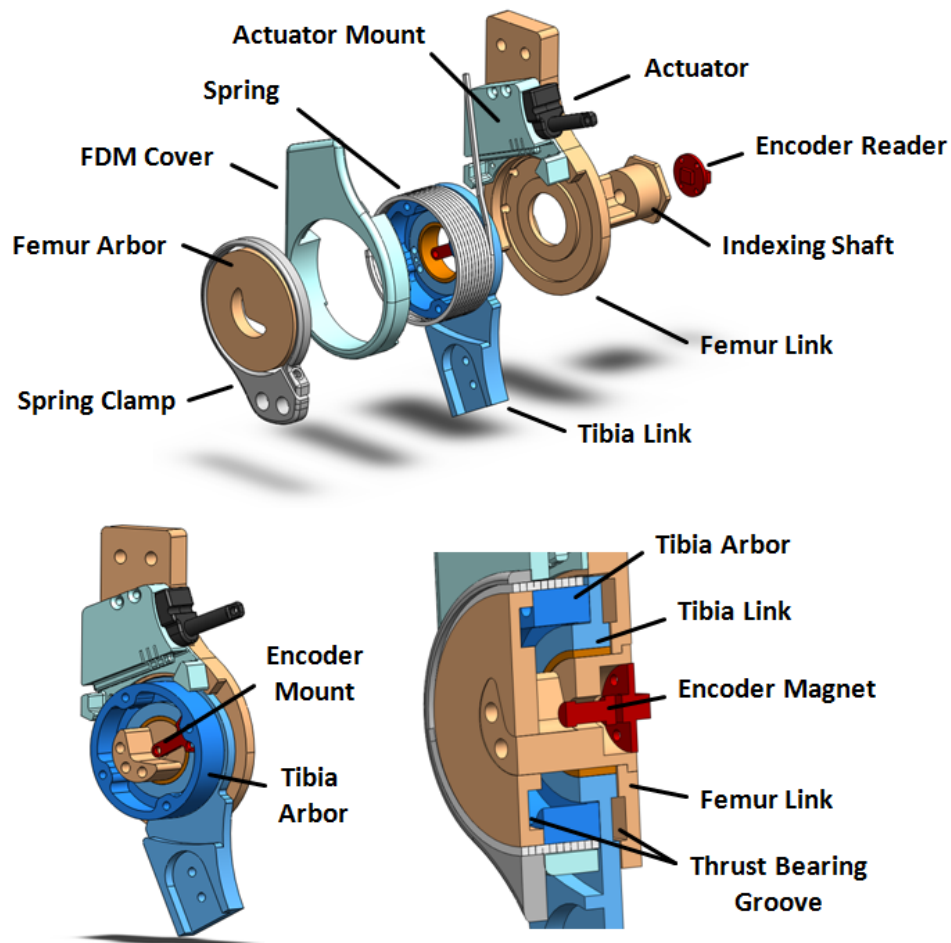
Wrap Spring Knee – Second Revision. Assembly and Section View
